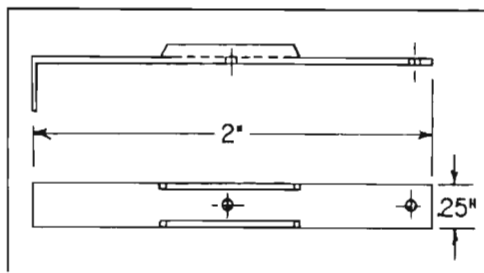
Work-piece is a formed brass spring. The rivet hole is on the right, and the guide hole in the center.
